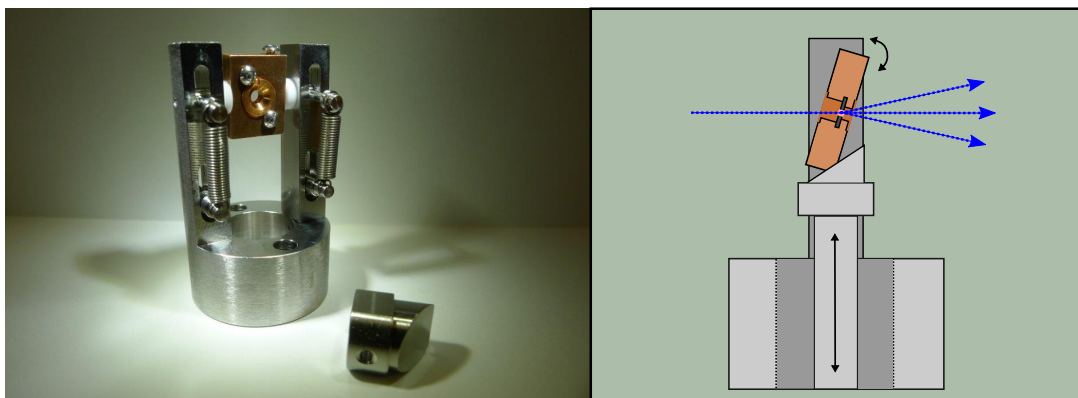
Picture and sectioned drawing of the spring loaded wedge mechanism for angular control about the transverse axis (tilt). Linear motion of the wedge controlled by the screw action stage at the lowest end of the chamber modulates the angle with up to 35° of range.
